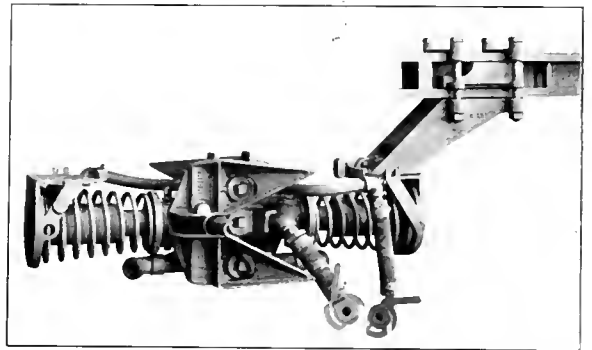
Method of Attaching to Three-Stem Passenger Coupler Shank
